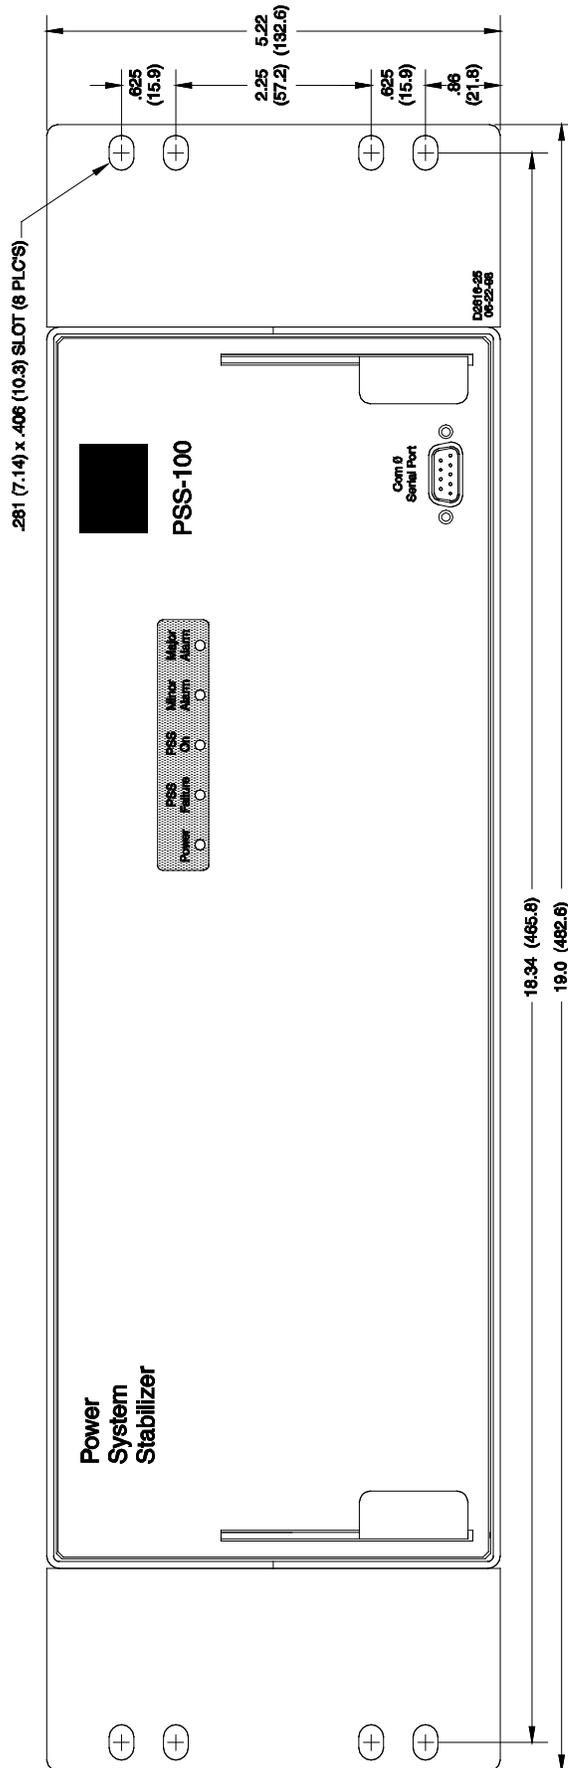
Rack Mount PSS-100 Outline Dimensions, Front View
